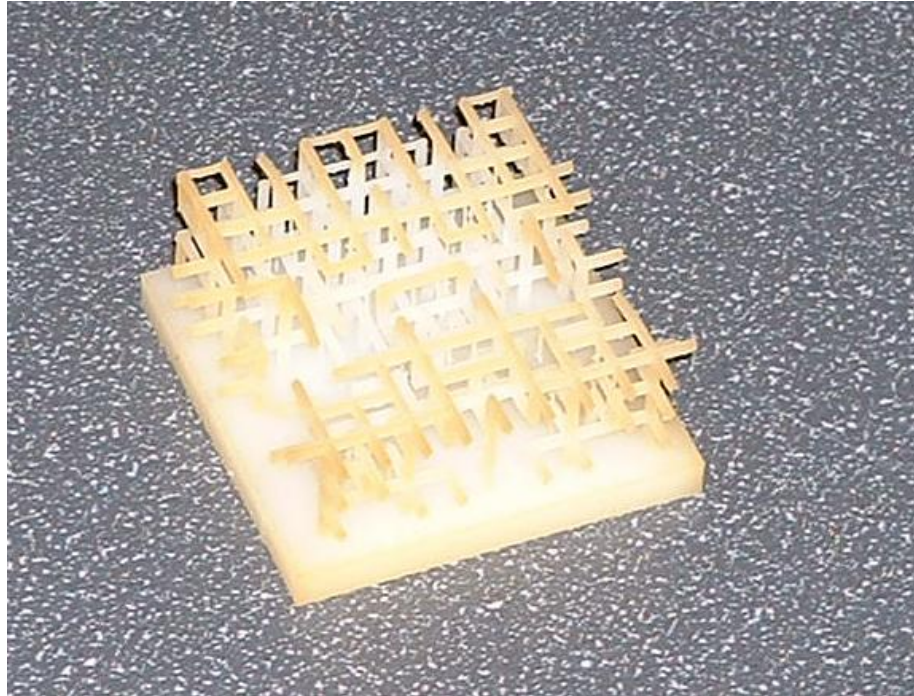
Second Three Dimensional Design Made From SL 7560 Resin
